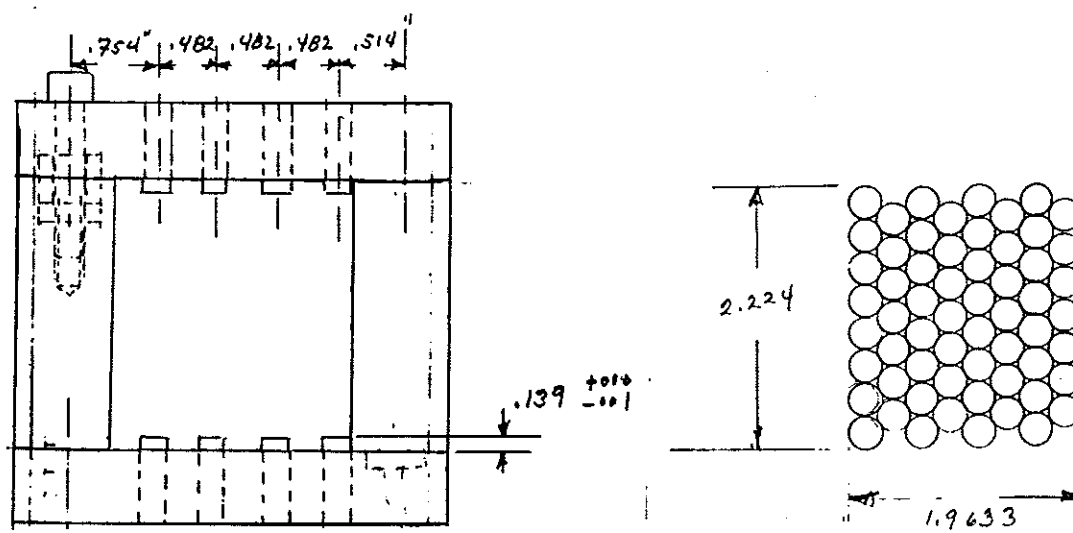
Preliminary sketch of the assembly fixture for eight-layer straw modules. The figure on the right shows the completed straw bundle in the orientation as it is built in the fixture on the left.
